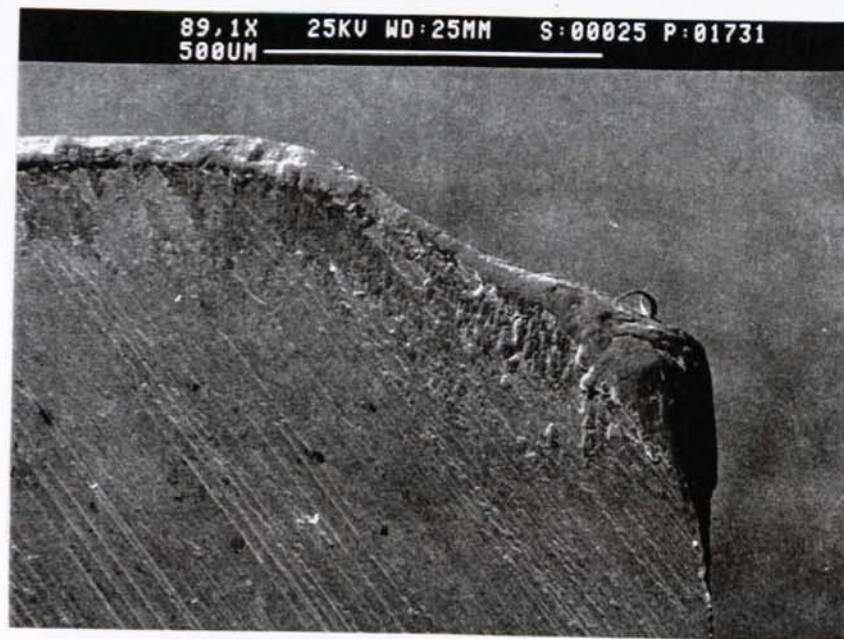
shows BT42 HSS at cutting speed 30 m/min. The wear mechanism is a combination of adhesion and abrasion. Also a closer examination of the figure reveals crack near the cutting edge.
